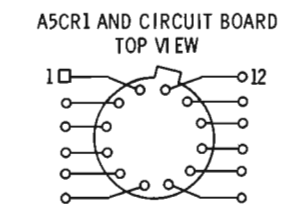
P/O A5 FM Driver Board Assembly Component Locations
